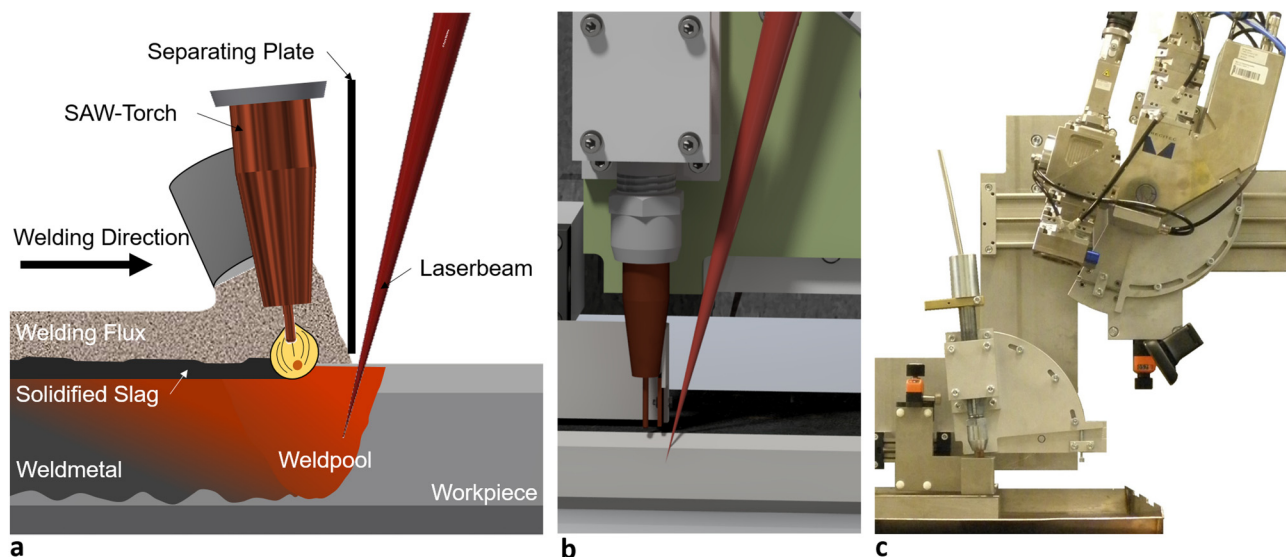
Welding setup SA-LAHW: process zone schematic (a); process zone computer-aided design model (b); hybrid welding head (c).
